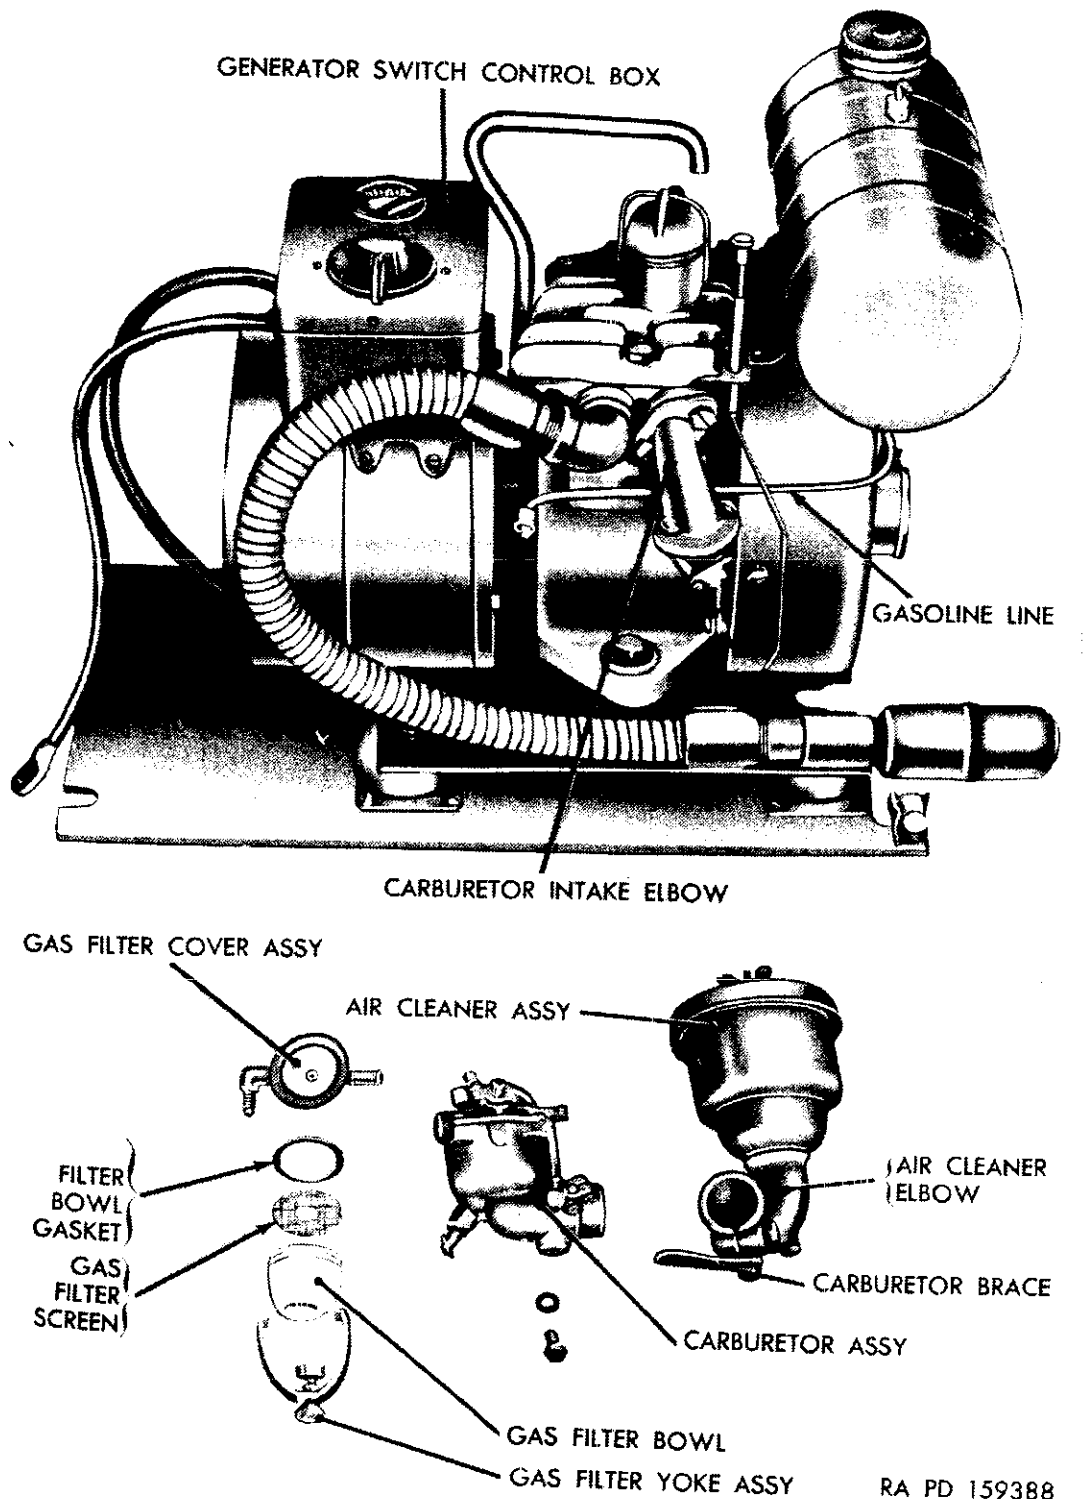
Power charger (carburetor, gas filter, and air cleaner removed).
